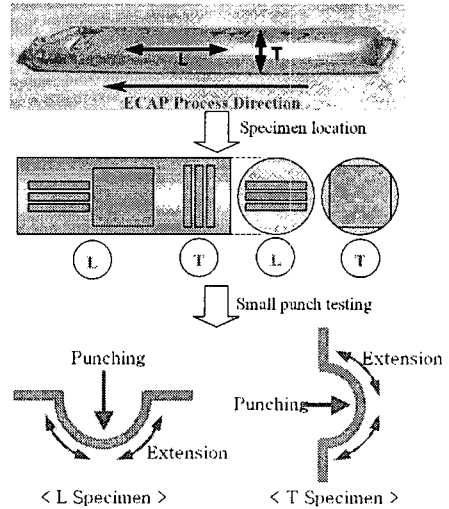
Specimen machining and directions of small punch testing for L- and T-specimens
